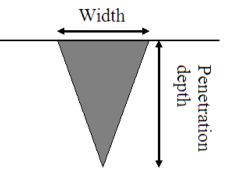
Weld nugget dimensions produced by spot laser welding.
